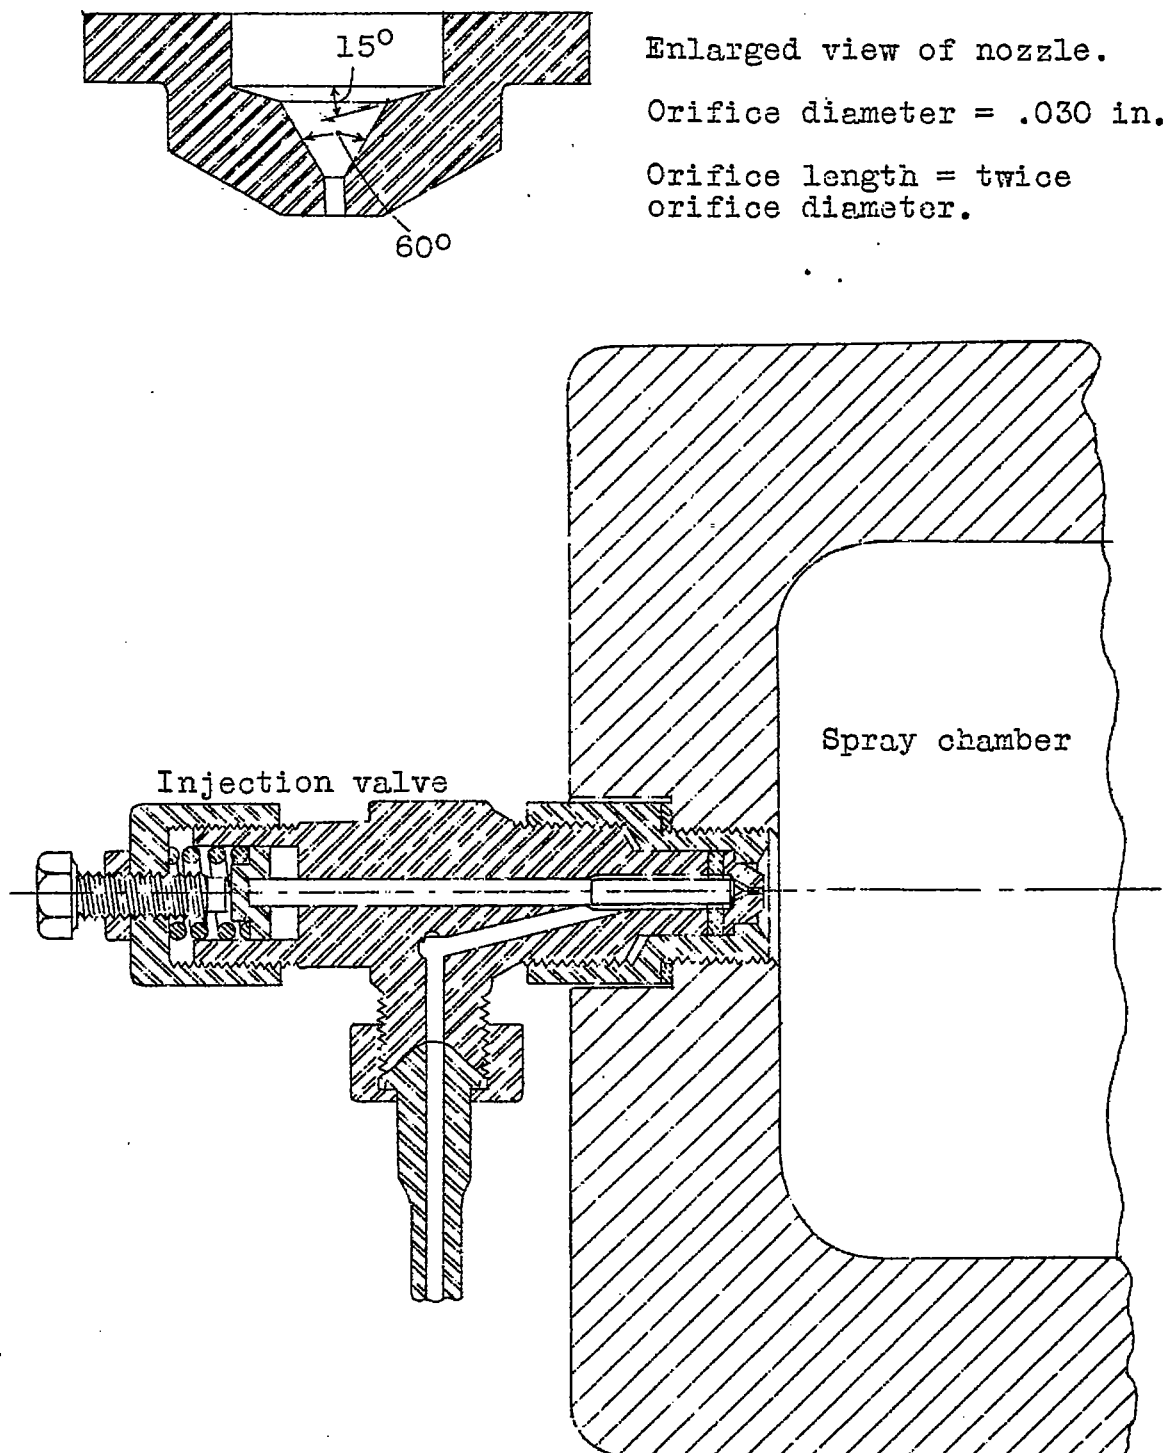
Automatic injection valve and nozzle used in comparison of open and closed nozzles.
